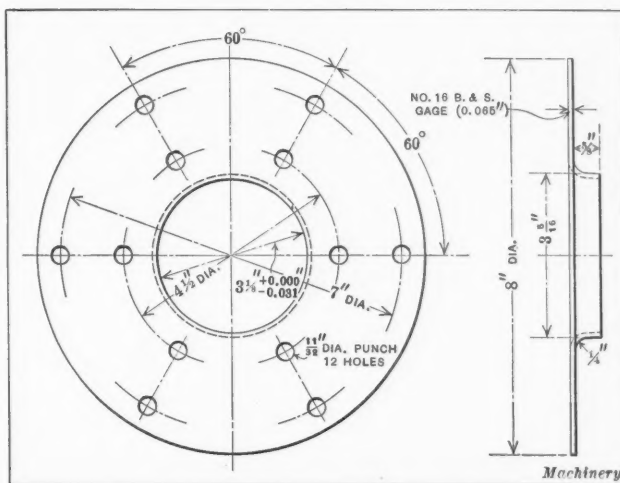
Tractor Wheel Spoke Cover produced in One Operation by the Die shown in Fig. 2
